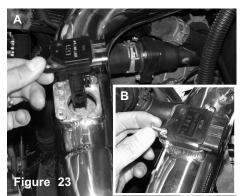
Figure A: Place the MAF sensor onto the machined welded flange. Figure B: Place 2-M4 button head screws onto the MAF sensor
